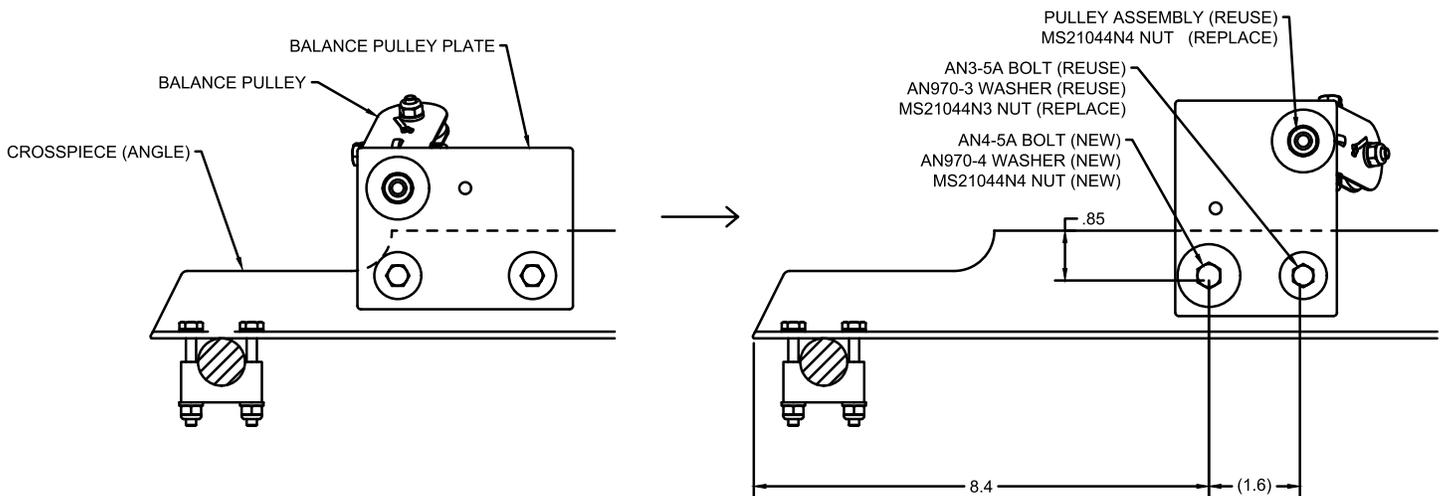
AUXILIARY PULLEY ASSEMBLY
